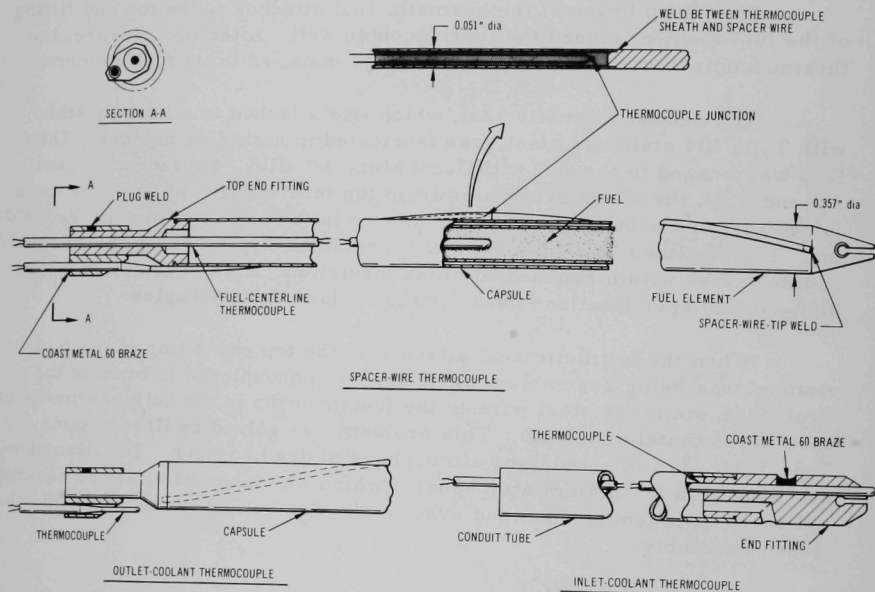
Methods of Attaching Coolant Thermocouples for Subassembly XX01
